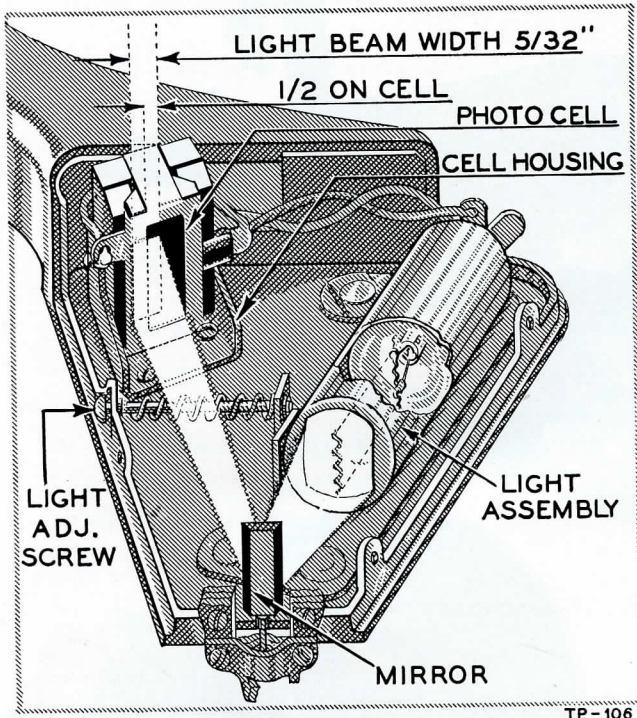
PICK-UP HEAD ASSEMBLY ADJUSTMENTS
